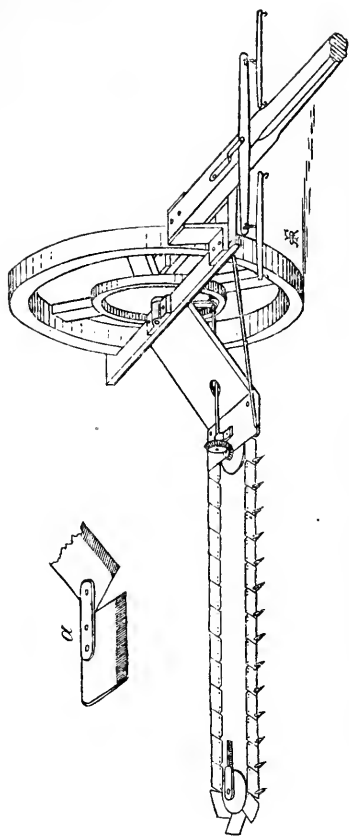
Perspective View of the Ketchum Machine. *a*, Section of Cutter Knives.
